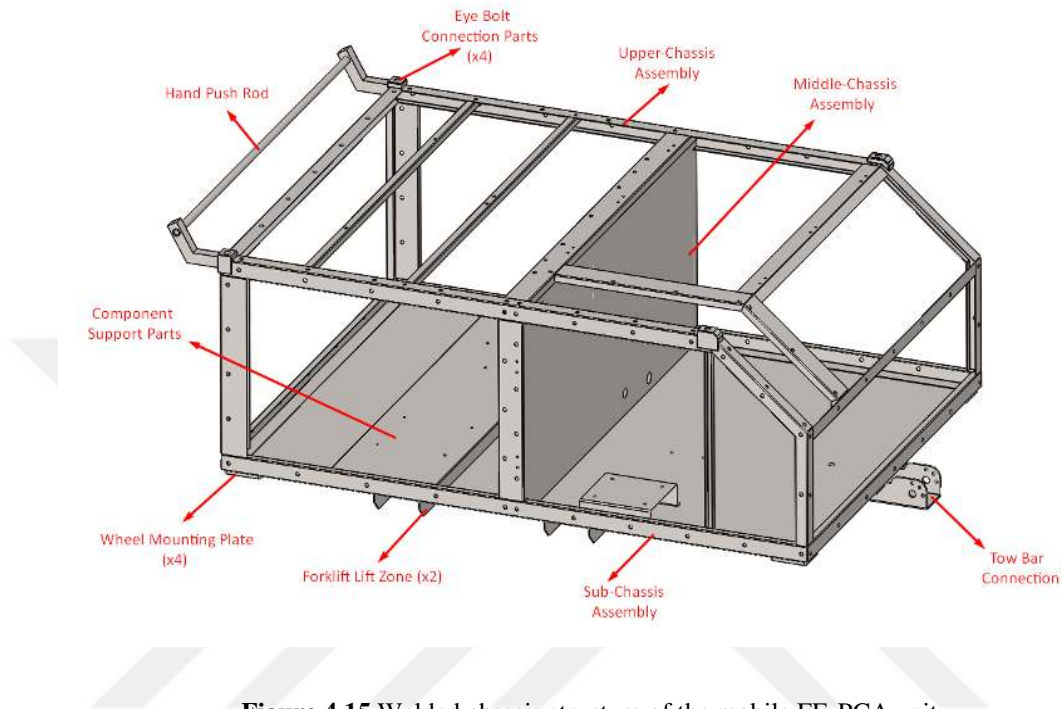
Welded chassis structure of the mobile FE-PCA unit
